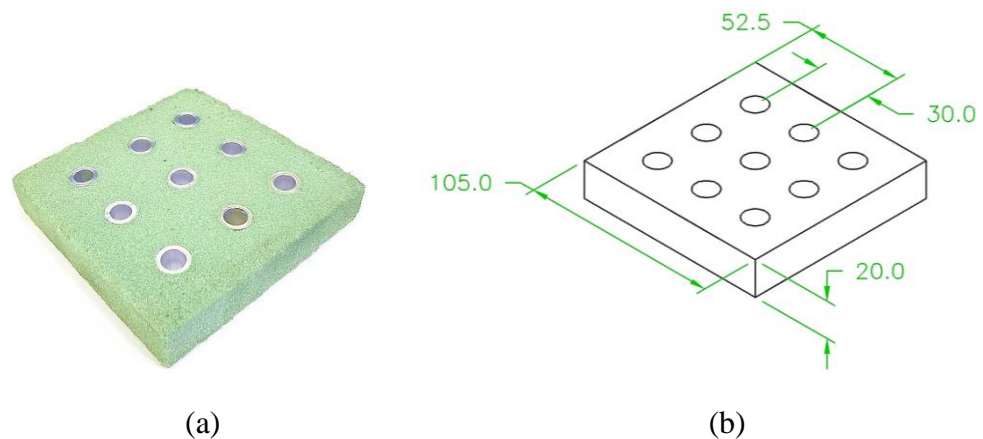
(a) Photograph of the aluminium tube-reinforced foam structure and (b) the dimensions of the test specimen.
